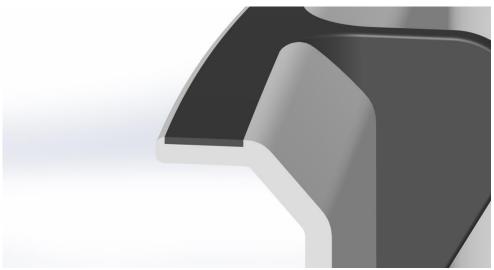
A section view of the CAD model, showing the seamless transition between the grip surfaces and the body of the holder.
